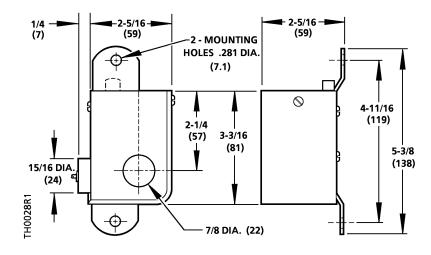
Dimensions of the 134-1510 and 134-1511 Control.
